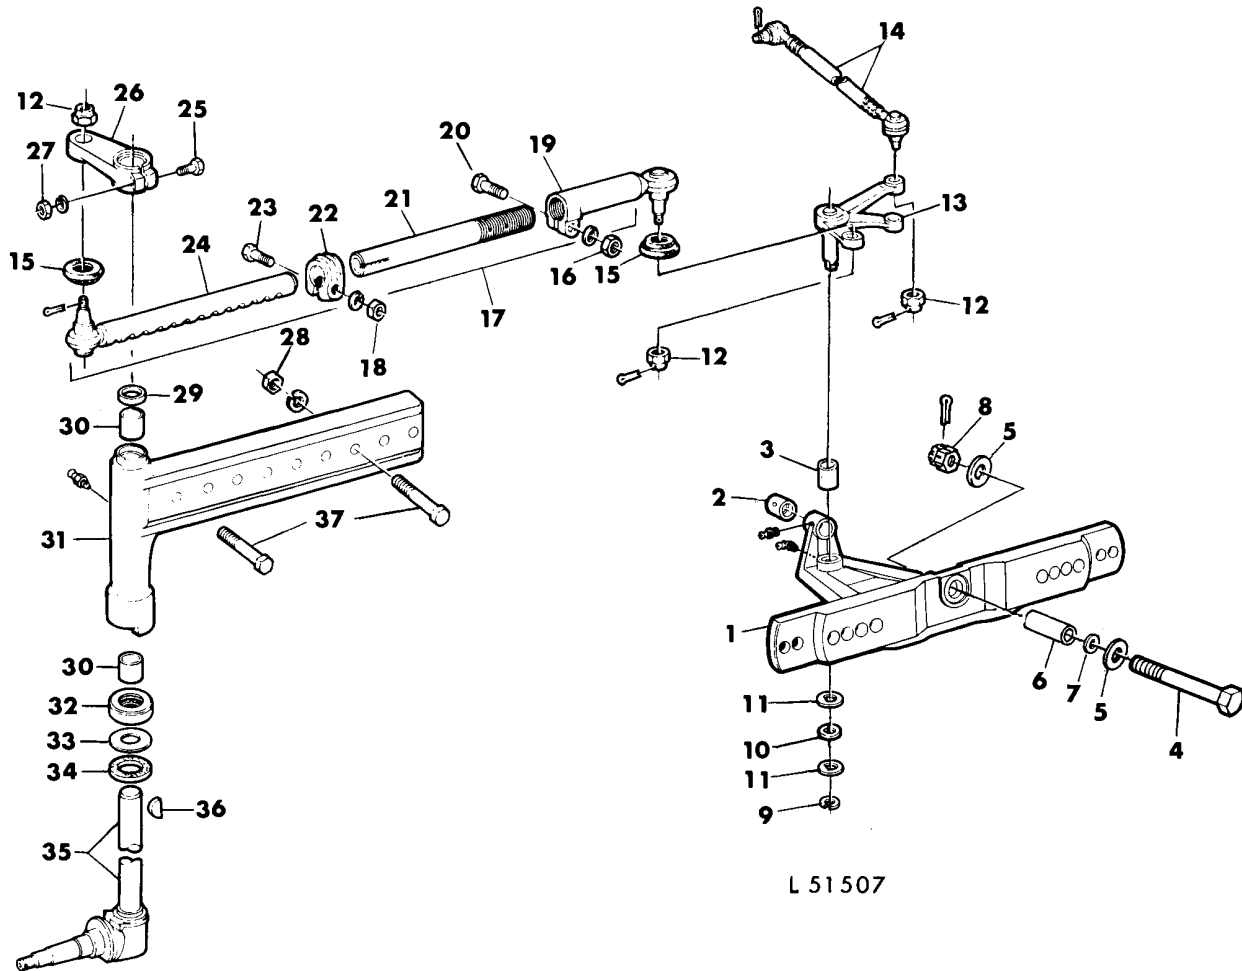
Parts of Front Axle Assembly (Standard Version)
